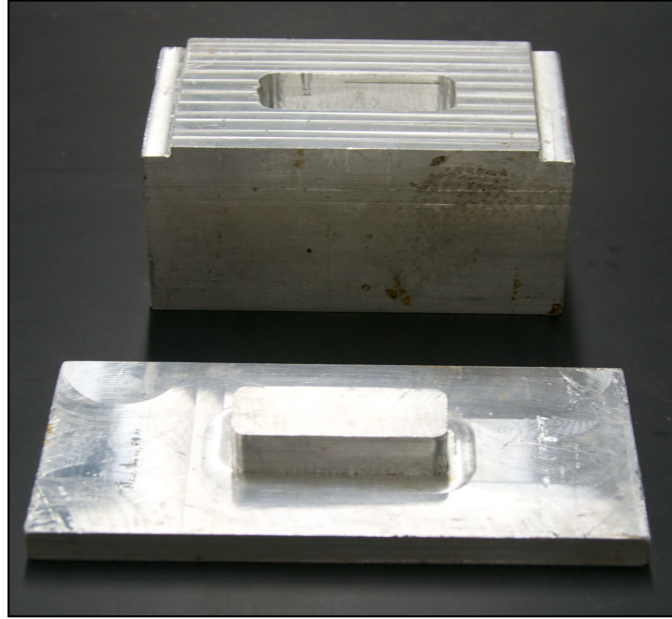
A picture of the final mold made from aluminum, with the base above and the lid below.
